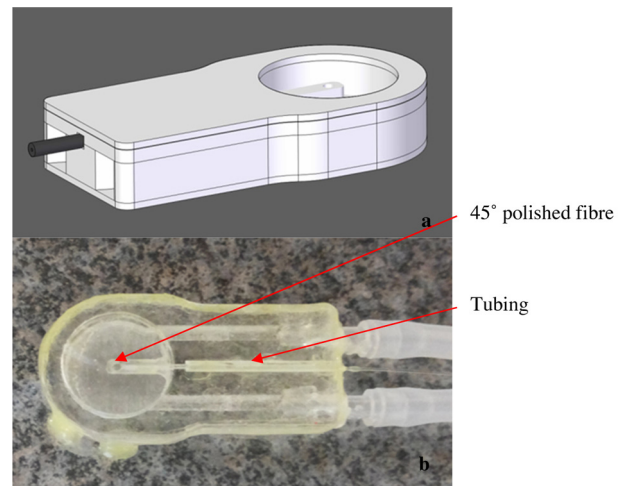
Top: a CAD rendering of the fully assembled device. Bottom: the completed device. The overall length of the device is $25\ \text{mm}$.
